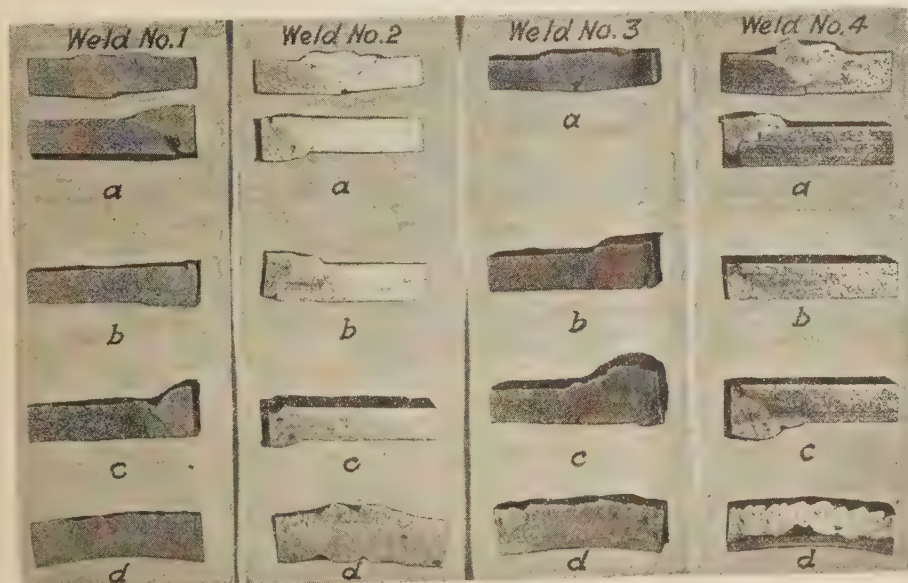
CROSS-SECTIONS OF ELECTRIC-ARC FUSION BUTT WELDS, COATED WIRE, 6-IN. STANDARD PIPE
